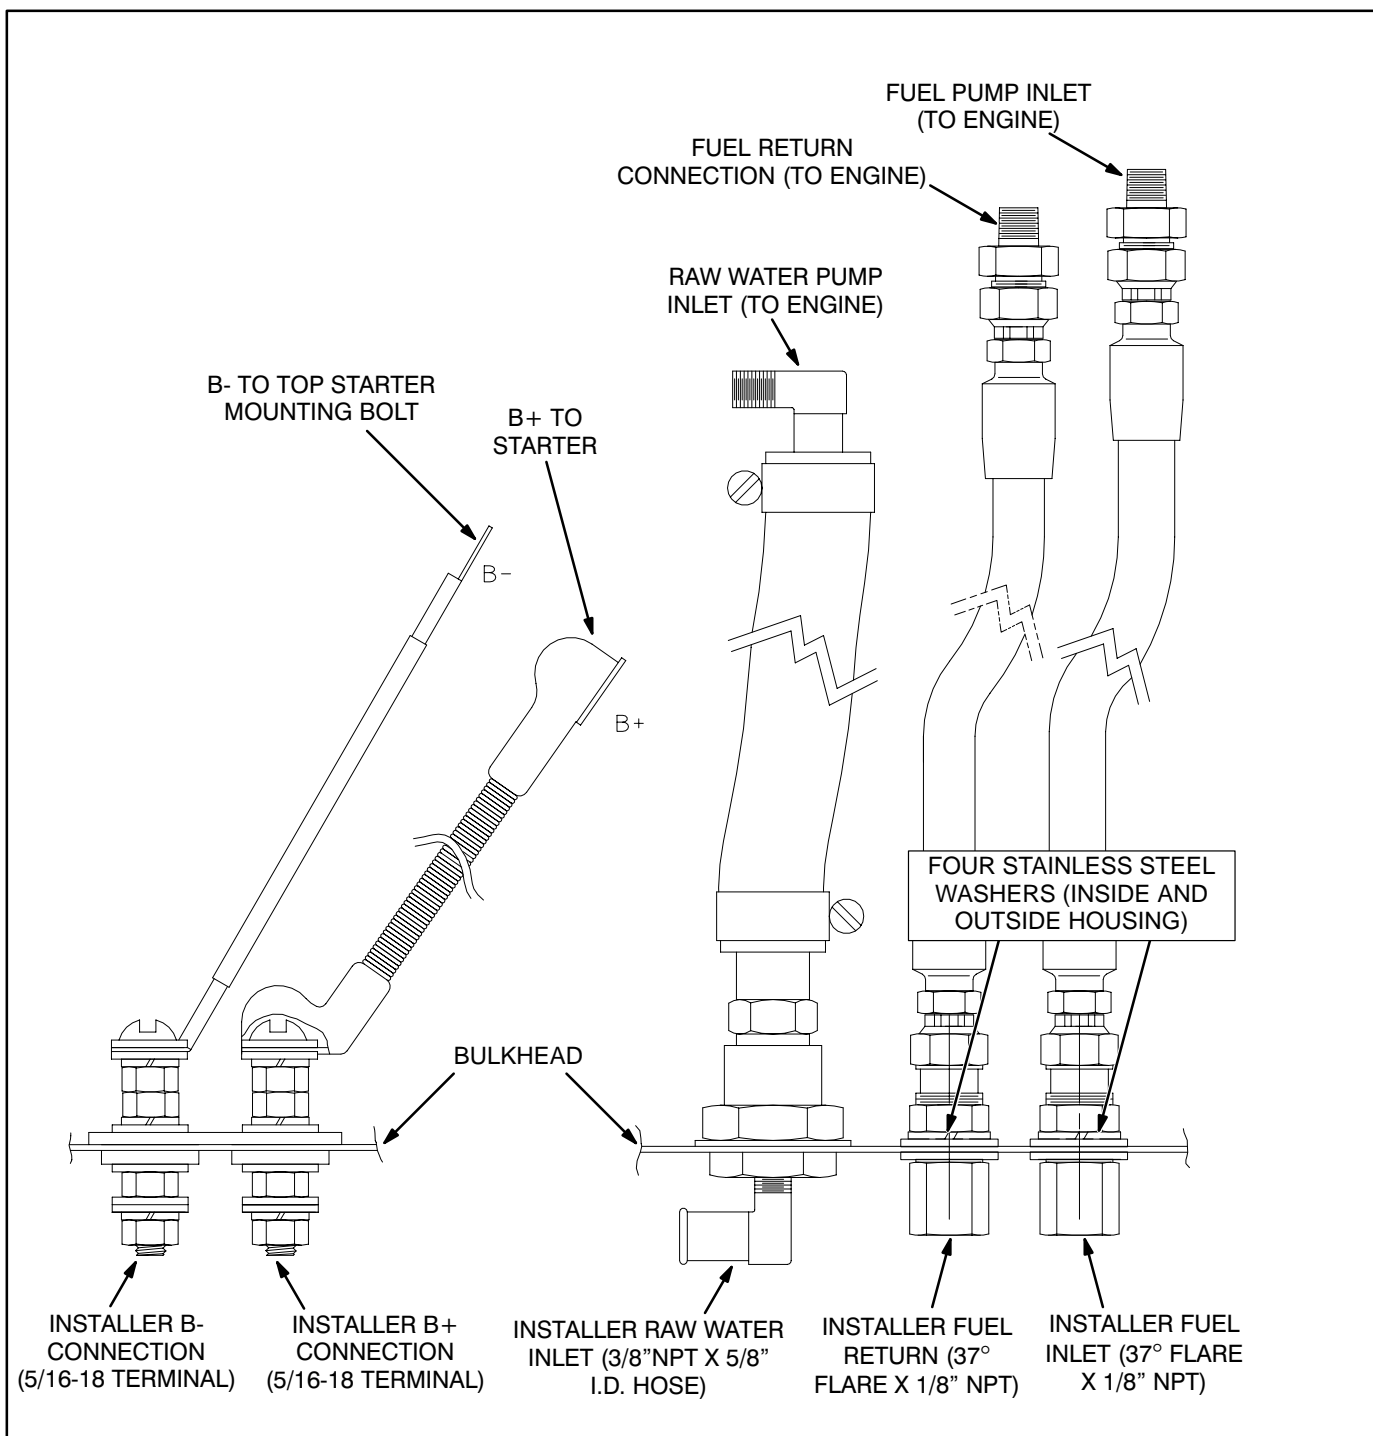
DETAIL OF BULKHEAD FITTINGS
